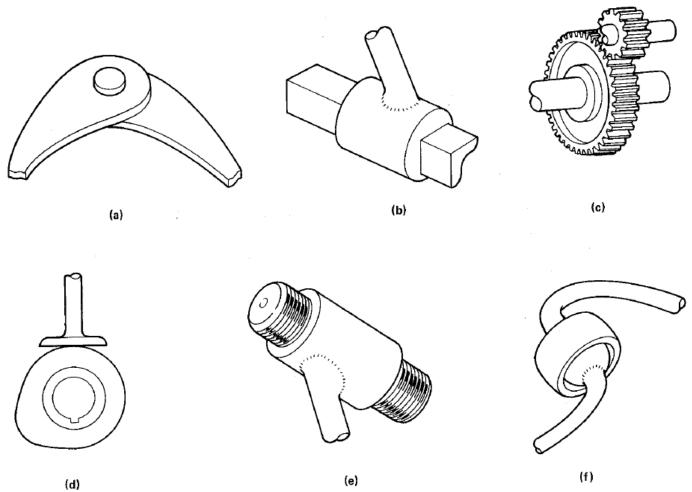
Example of kinematic pairs: (a) revolute joint, (b) translational joint, (c) gear set, (d) cam follower, (e) screw joint, and (f) spherical ball joint.
